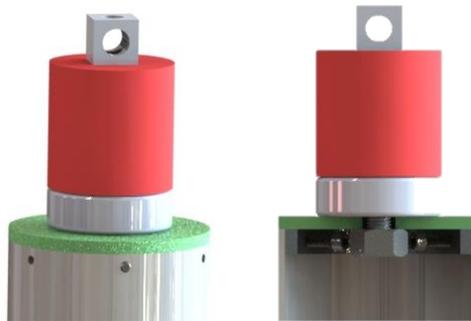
ARRD and One-Way Shearing Bulkplate with section view showing internal nylon shear pins.
